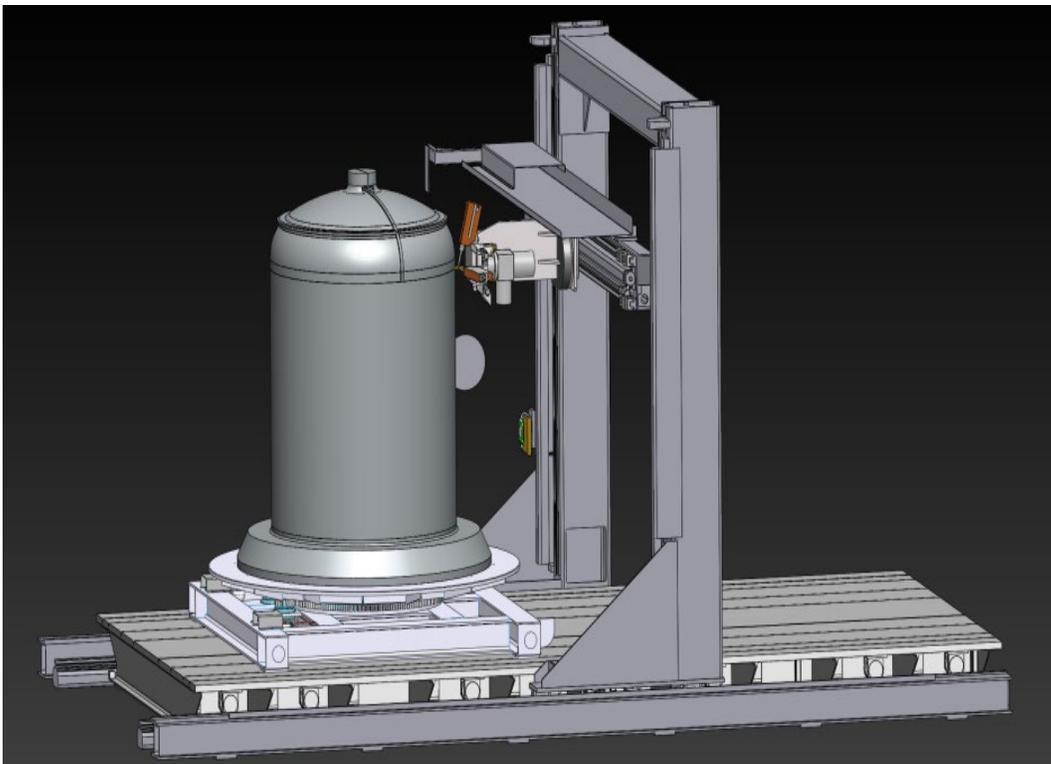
EB welding will also be used to join the lower head to the lower flange shell.
